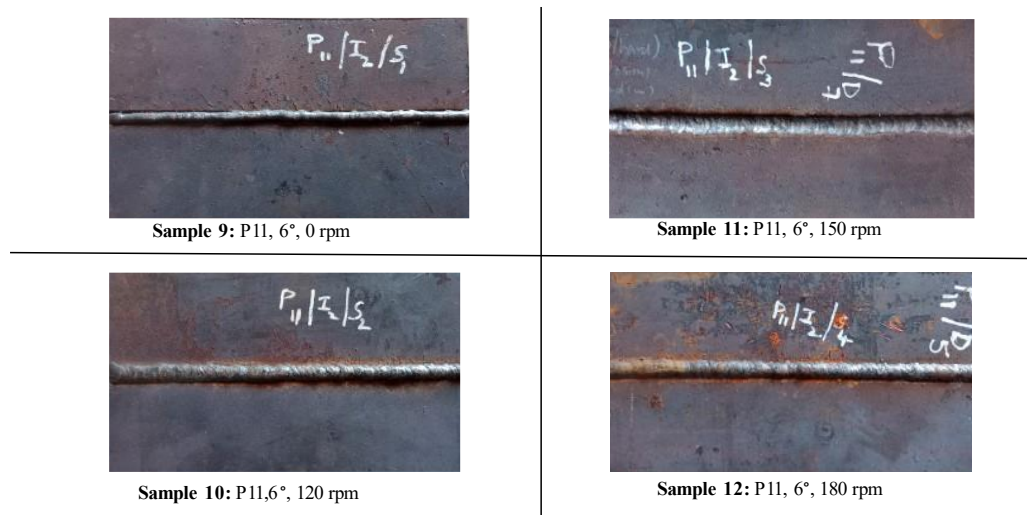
Welded specimens with 6° torch inclination
